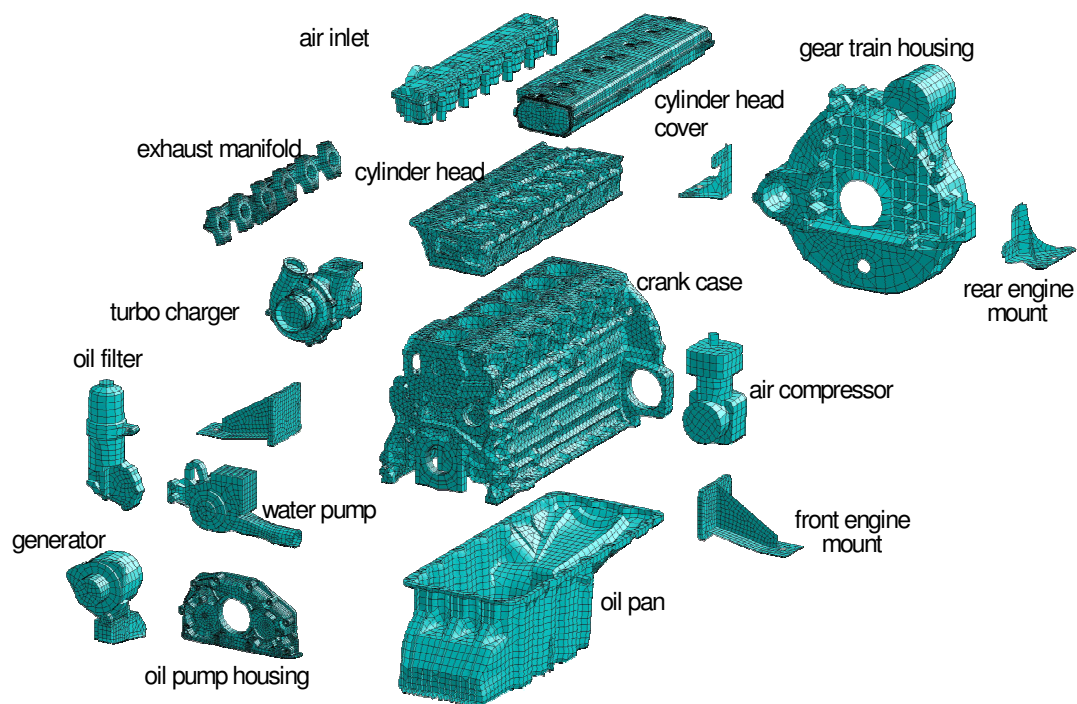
FEM models of engine parts of a truck engine, w/o crank train, exploded view
